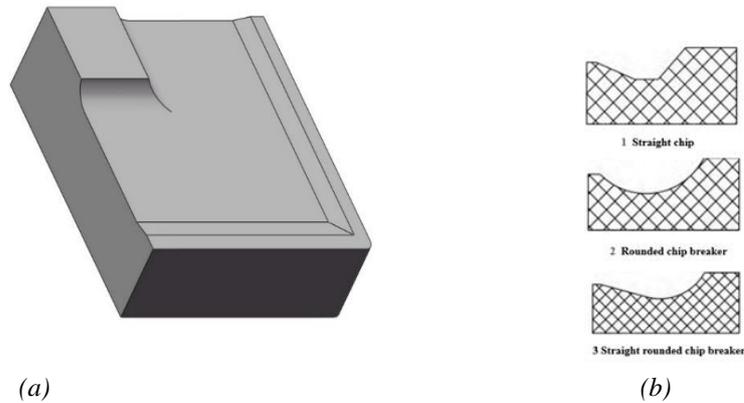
3D model of the cutting part of the tool with different chip breakers
